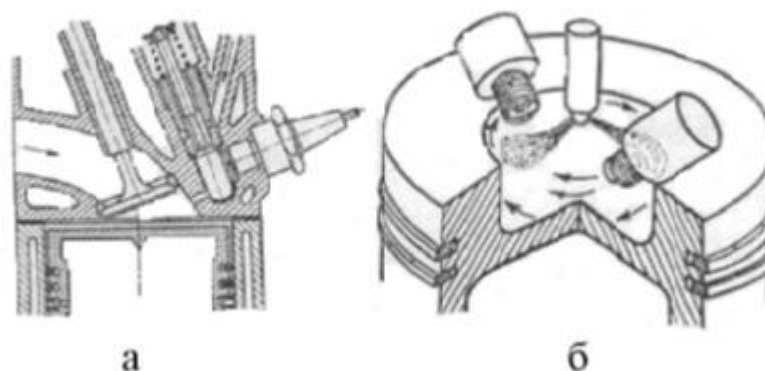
Combustion chambers of internal combustion engines running on gasoline: a) ignition of the torch in the fork chamber; b) burning the charge in layers.
